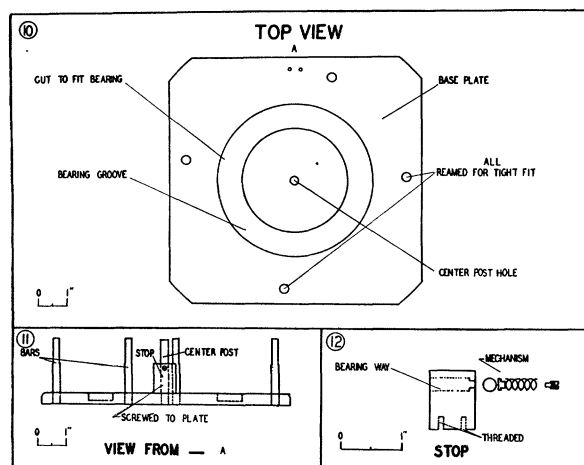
Views of the base plate upon which the thrust bearing rests and to which is fixed the top plate shown in Fig. 1. The bars on pins (insert 11) are friction-fixed into this base plate but fit loosely into the top plate; the top plate is thus prevented from turning when the turntable or sample receptacle tray is rotated, but at the same time the top plate is permitted to ride freely upon and to seal the top of the turntable. The bearing surfaces between the top plate and sample tray are coated with a thick grease. A seal is further insured by the weight of the counter, top plate, and center post, which compresses a rubber washer against the center of the top plate, pressing it toward the bottom one.
